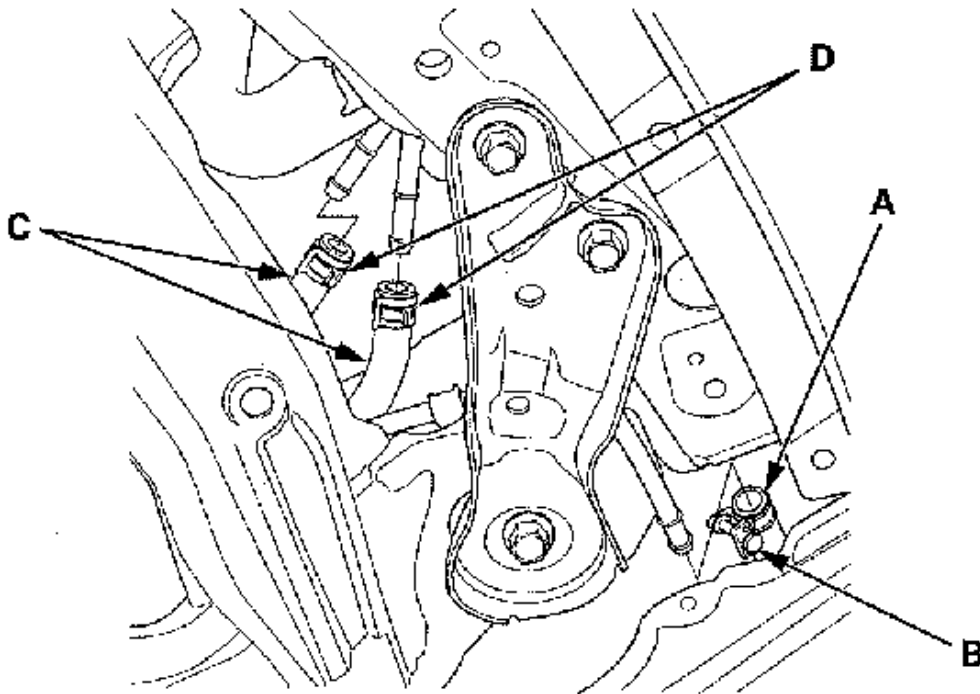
Identifying Power Steering Hose And A/T Cooler Hoses
